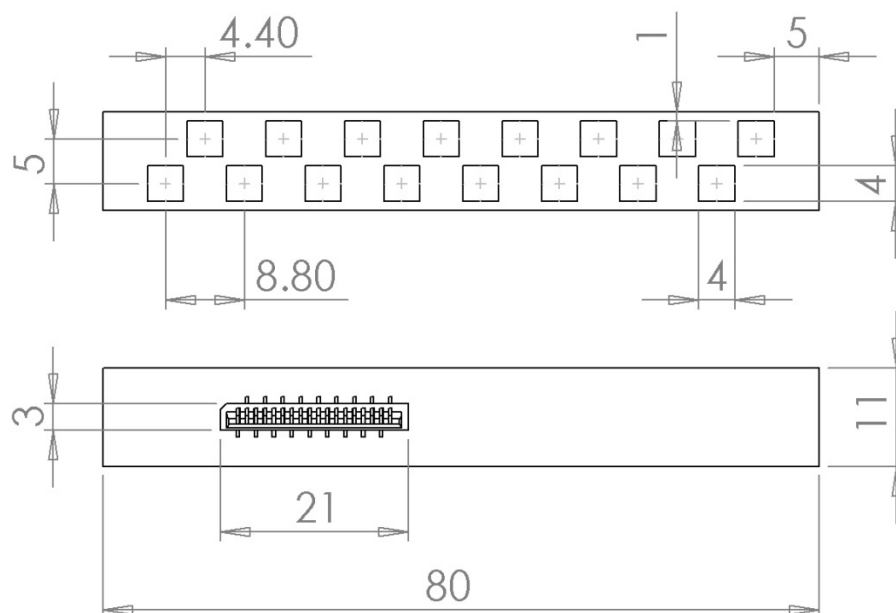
Sensor Board layout. This custom PCB holds 16 sensors arranged in 2 alternating rows of 8 in order to cover an optimum surface area of the wheel.
